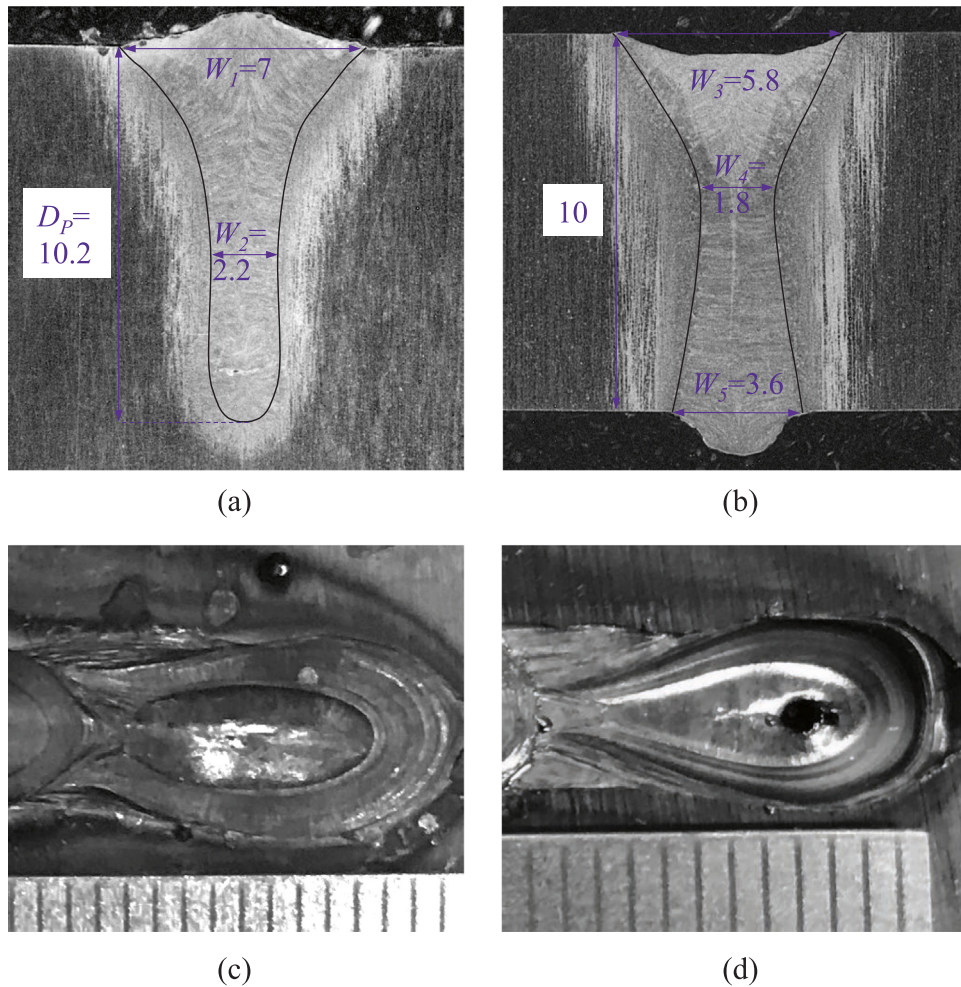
Weld cross section of: (a) case I: partial penetration, (b) case II: full penetration experiments. Weld pool shape at the stop point of (a) case I: partial penetration, and (b) case II: full penetration welds. Both used the same process parameters presented in Table 2. Note: W : Width, and D_p : Penetration depth are in mm.
